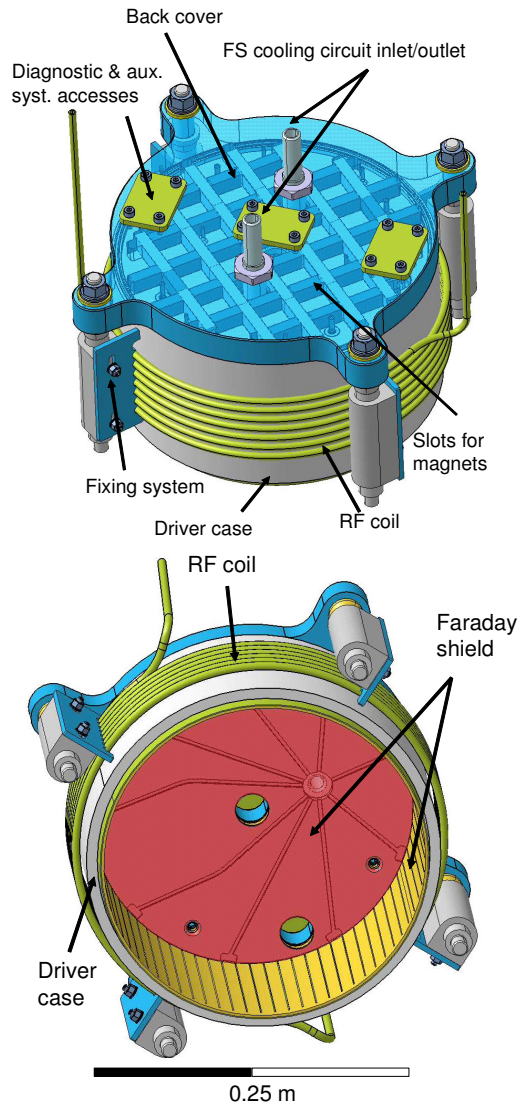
Isometric view of the driver assembly – (a) rear and (b) front side
